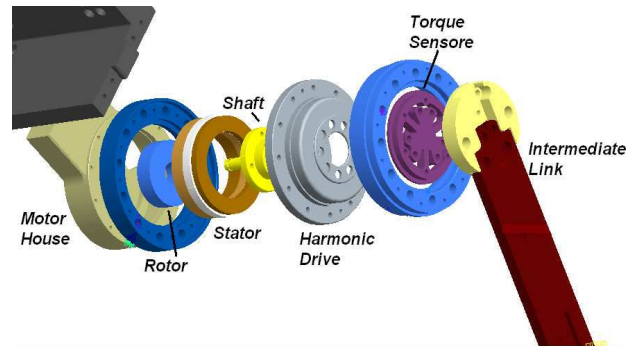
Exploded view of M1, Harmonic drive and intermediate link
